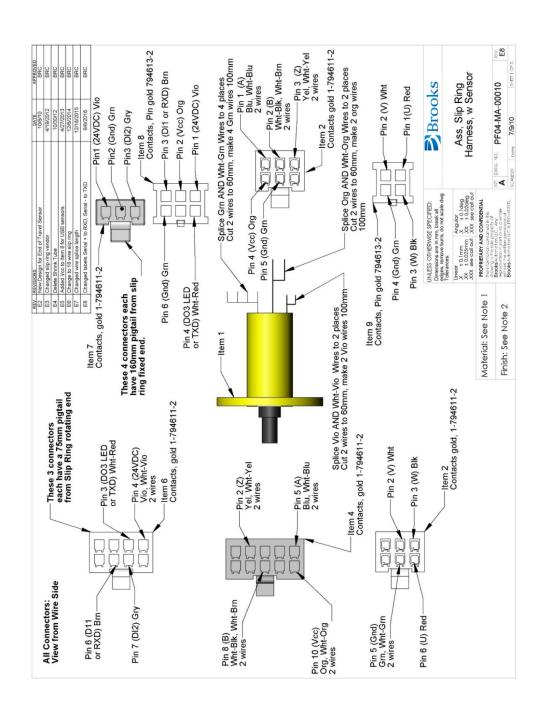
Assembly, Slip Ring Harness with Sensor
